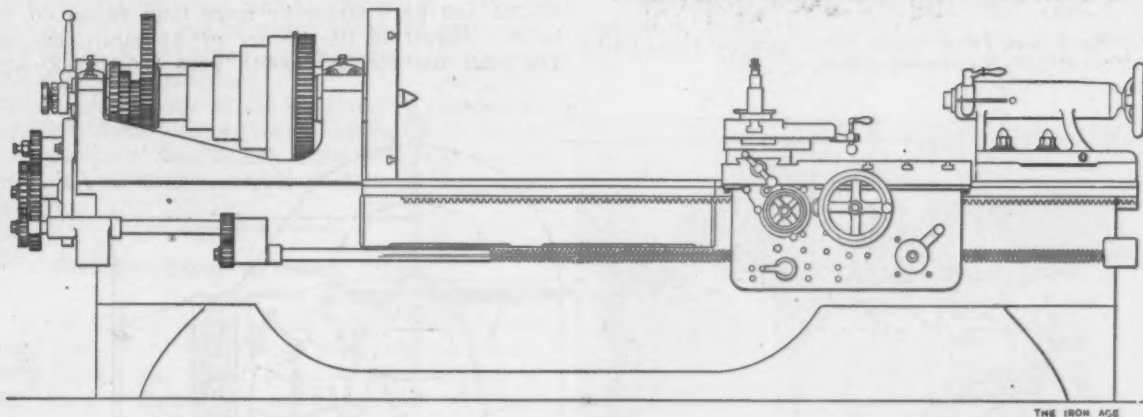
The Lathe with a Block Inserted in the Gap, Converting it into an Ordinary 22-Inch Engine Lathe.
